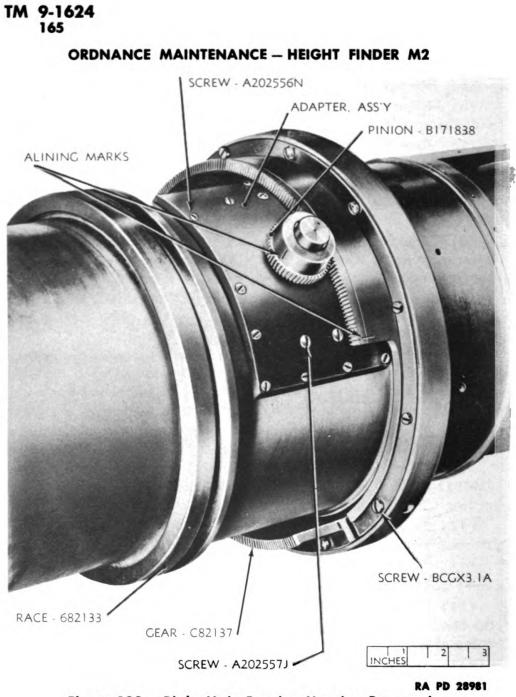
Right Main Bearing Housing Removed Showing Conversion Gears
